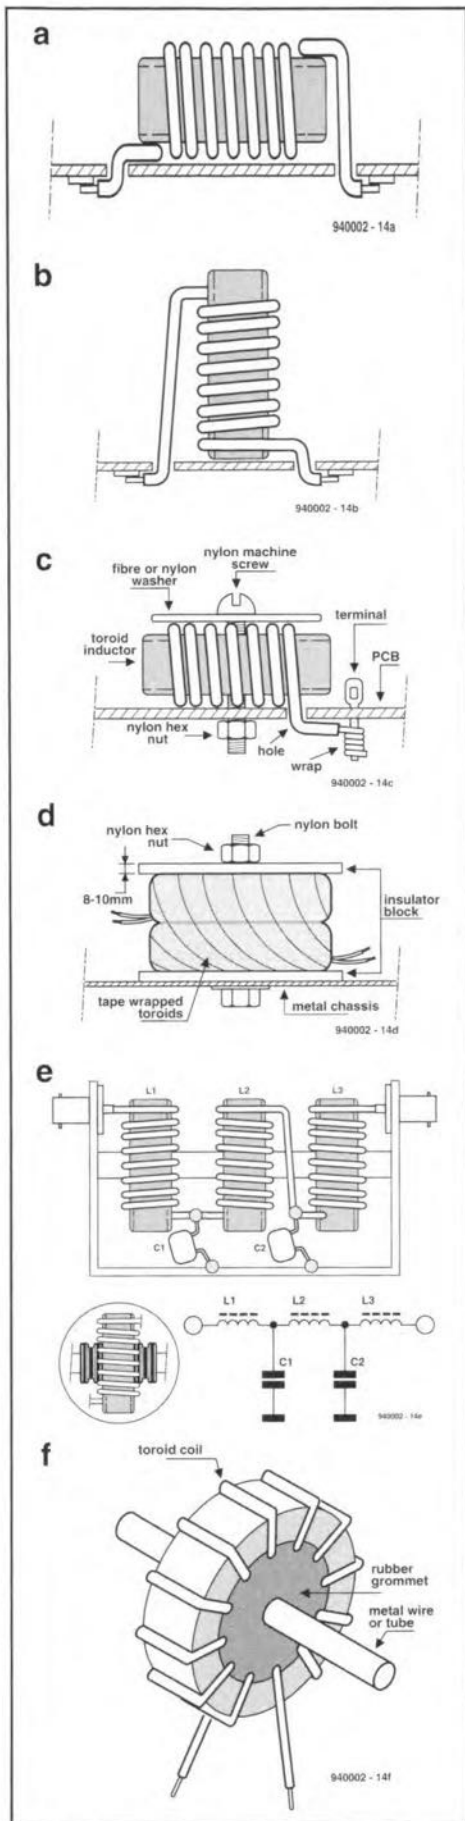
a) flat mounting; b) on-end mounting; c) secured mounting (use nylon machine screws); d) mounting high power or high voltage toroidal inductors or transformers; e) suspending toroid inductors on a dowel; f) mounting method for a 'single turn primary' transformer in RF watt-meters or VSWR meters.
